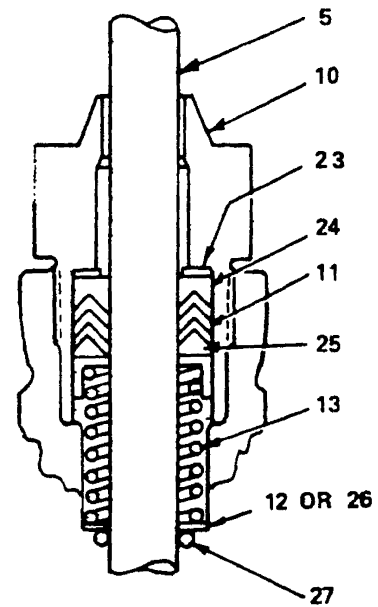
a. Packing Assembly for 125 lb Valve Rating, 2-1/2, 3, 4, 5 and 6 Inch Valves
